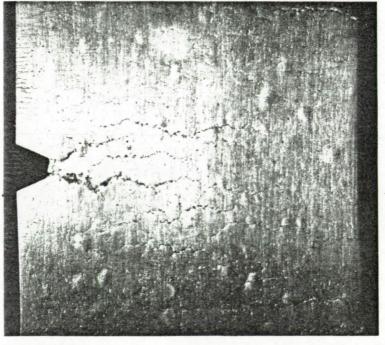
Surface crack pattern of Specimen No. V-T2 after three fatigue cycles.
